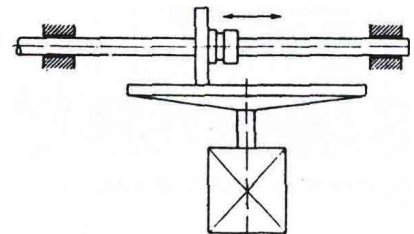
Friction gears: crown gear with sliding gear wheel.
